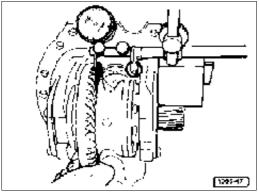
Measuring the backlash between bevel pinion and ring gear teeth.
